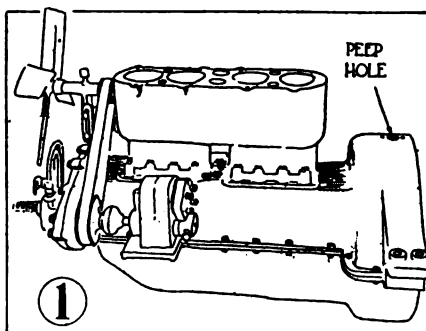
The peephole of the Koehler engine is on top of the flywheel housing, and the cover is easily removed
